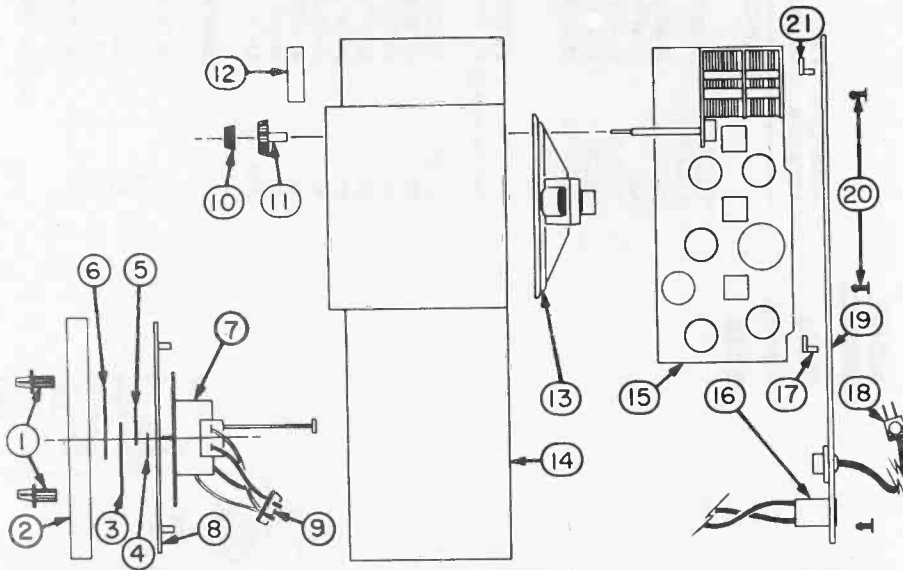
EXPLODED VIEW OF CABINET PARTS
